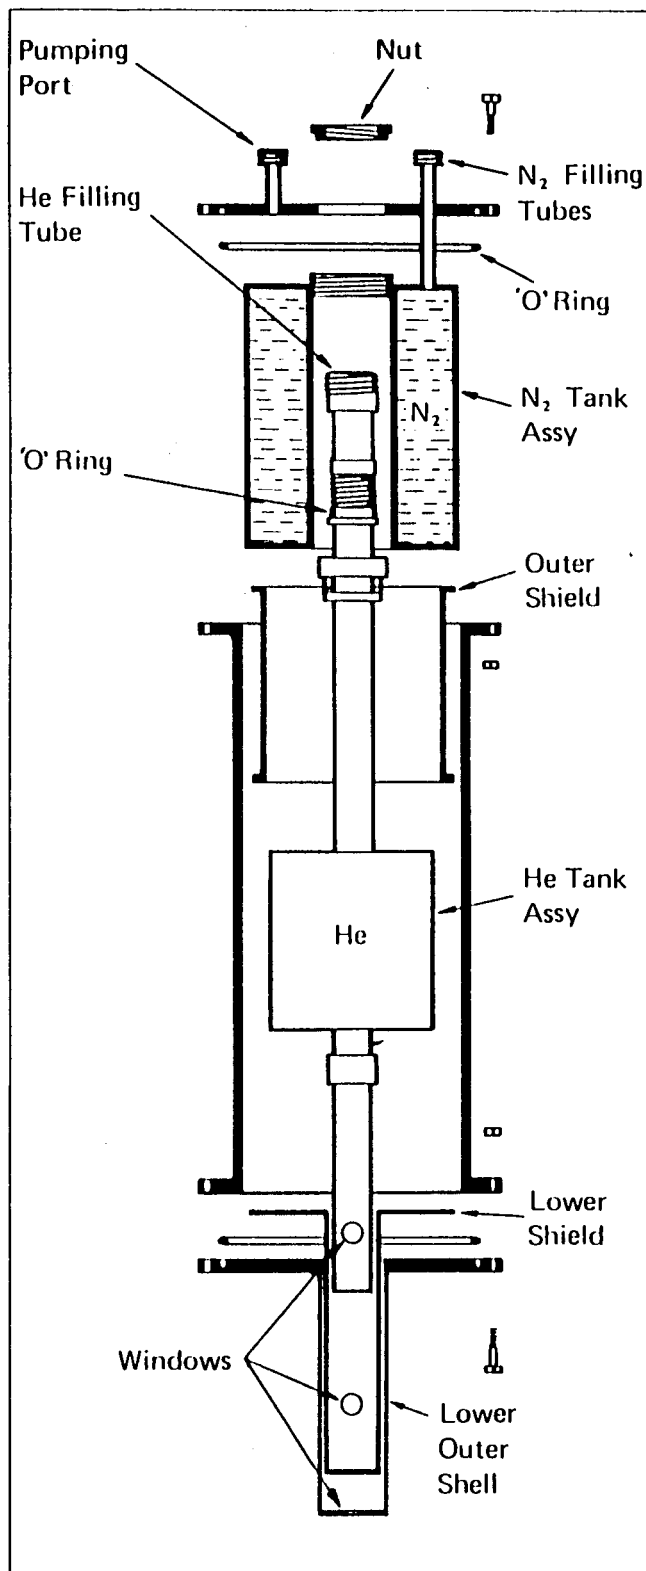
Exploded section of the Harwell MHC 200 cryostat.
